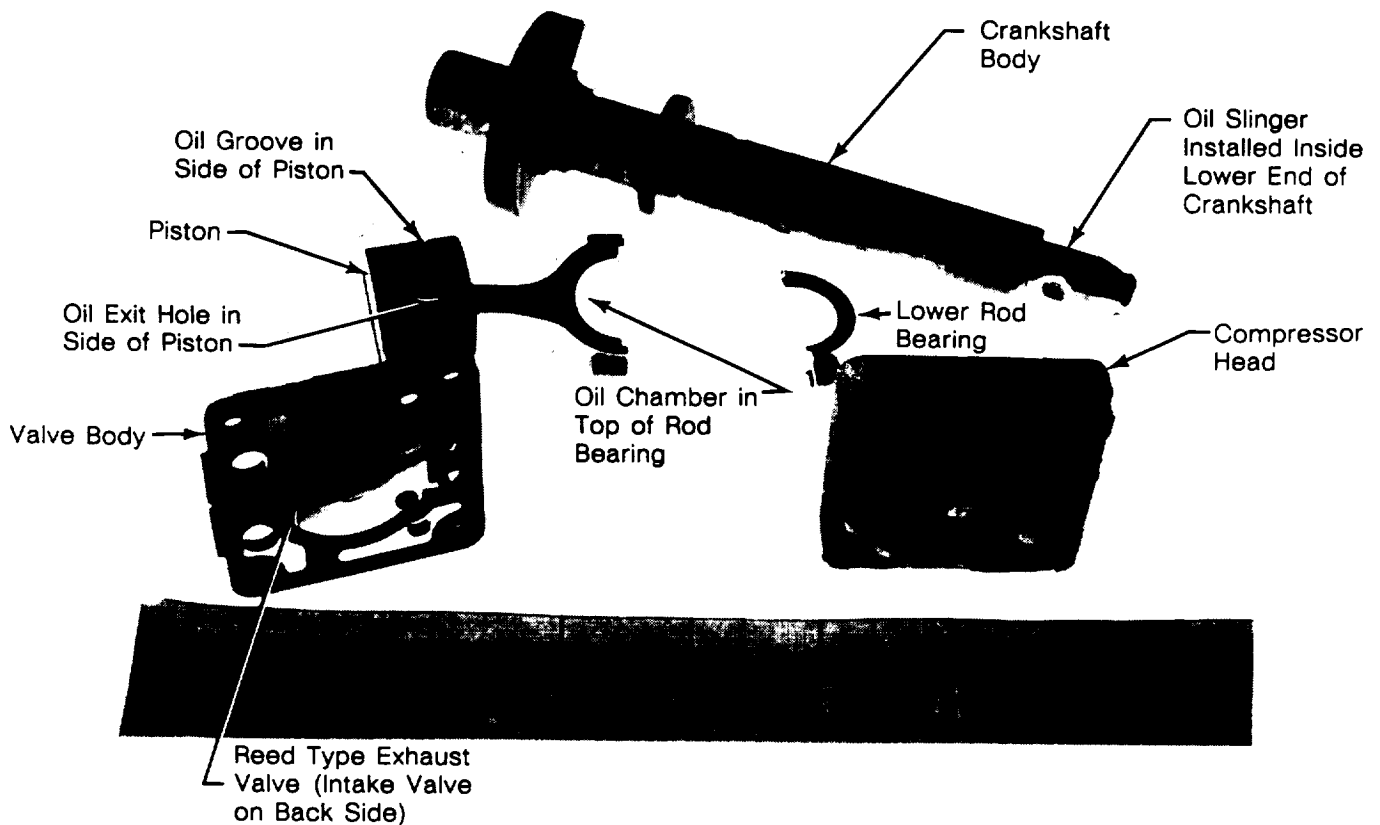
Crankshaft, Piston, Rod, Rod Bearings, Compressor Head, and Valve Body (Scale = in.)
